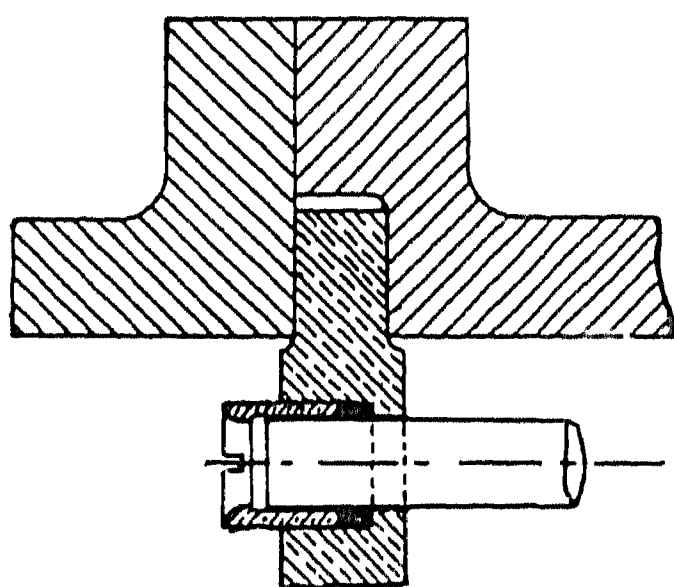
Attachment of Condenser Tube and Tube-plate
